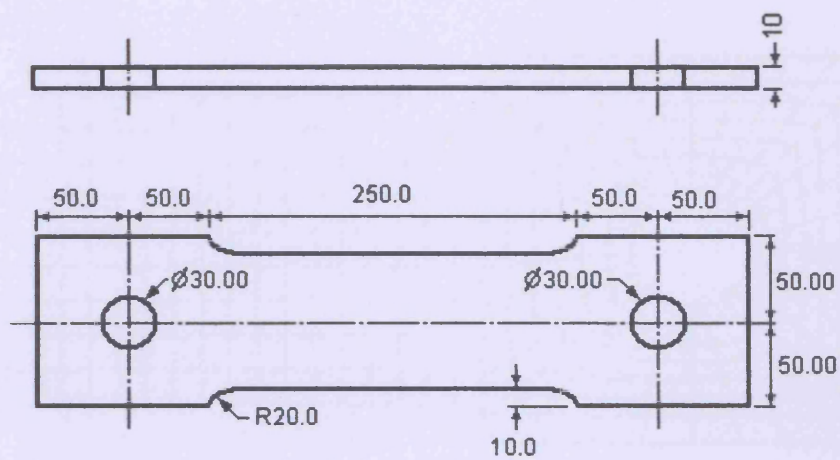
Dimensions of the specimens for fatigue testing (units in mm).
